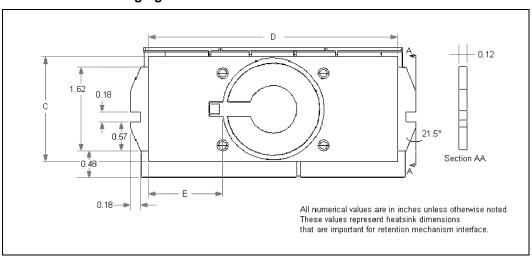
Front View Space Requirements for the Boxed Processor with S.E.C.C.2 Packaging
